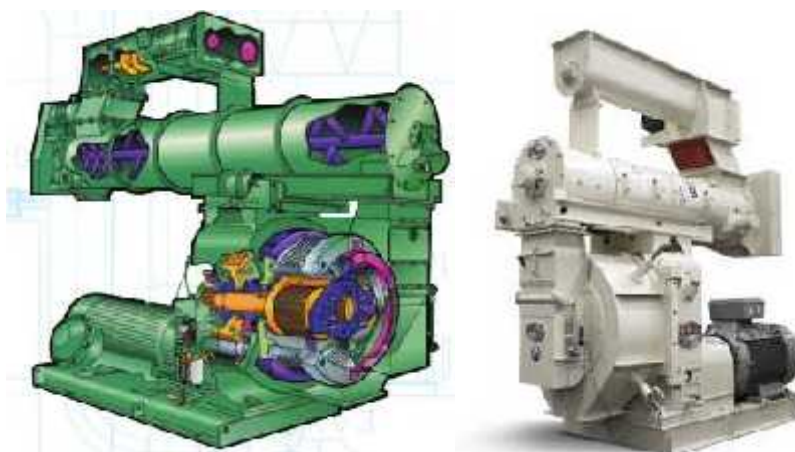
Ring die compact pelletizing equipment–CMPCCompany [14]
